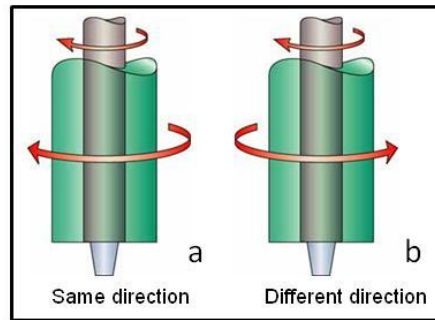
, Principle of Dual Rotation Friction Stir Welding:
